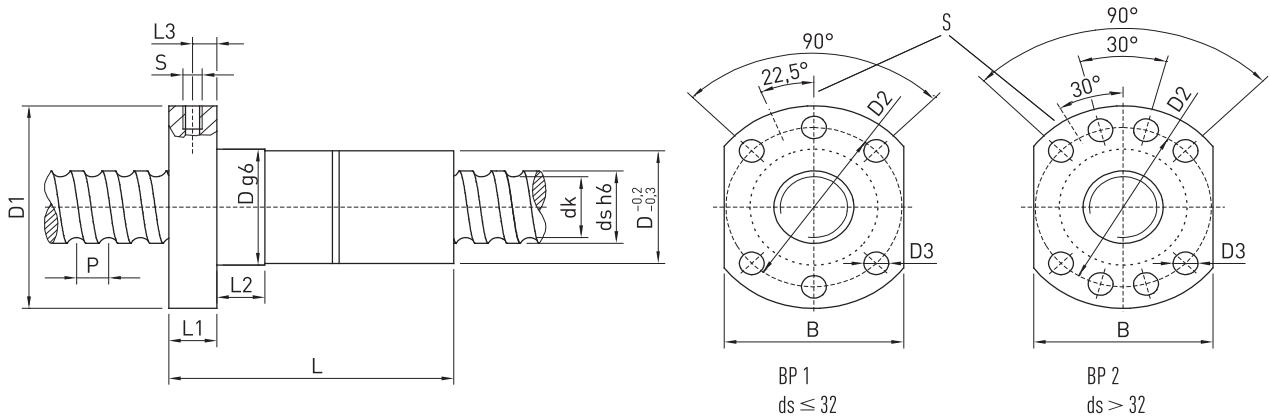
Flange double nut DDB-x with Wiper N and F
